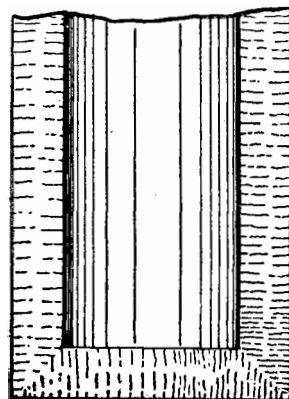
A CASTING OF THE WEAKEST FORM.
